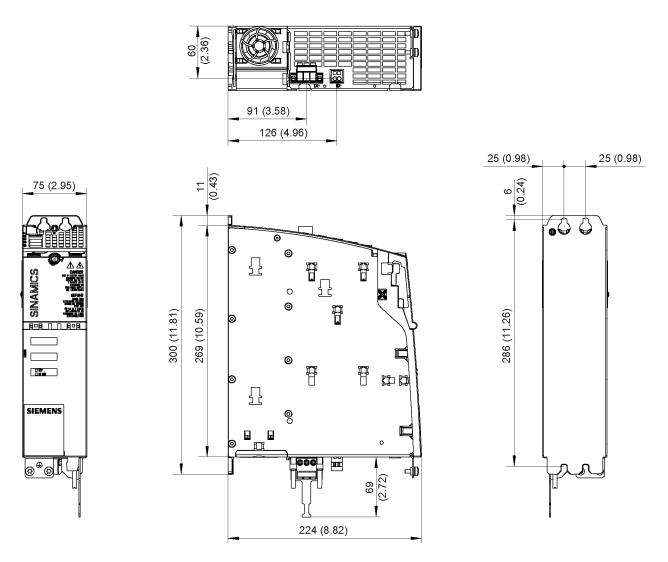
Dimension drawing of 18 A Motor Module Booksize Compact, all dimensions in mm and (inches)
